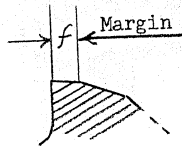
Formation of shoulder on tooth in the milling of reamers.
